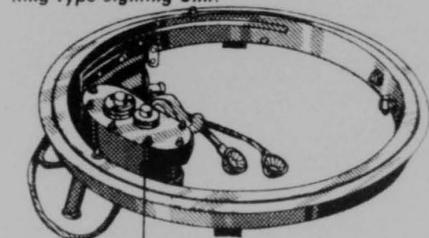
Azimuth Selsyn Generator Assembly Mounted on Inner Ring.
